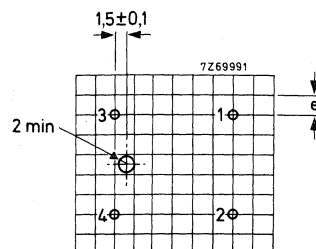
Hole pattern for mounting on a printed-wiring board (component side). Hole diameter $1,3 \pm 0,1$ mm. $e = 2,54$ mm (0,1 in).
